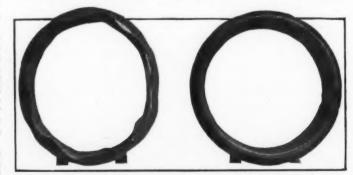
Malleable Iron clutch ring castings tested to prove that carbon particles do not injure the structure of the metal
